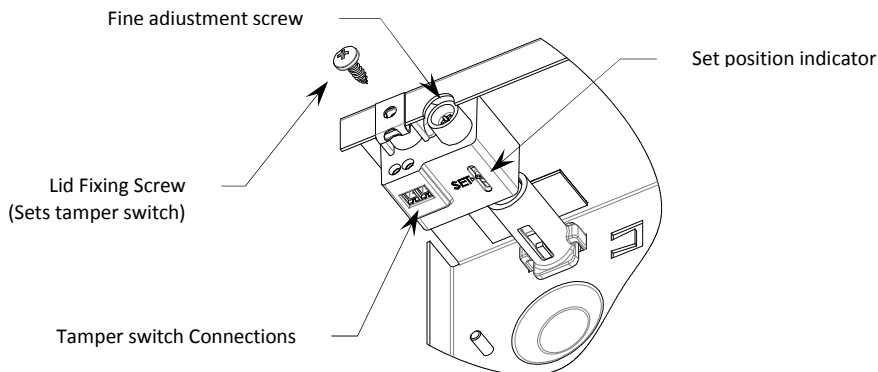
Position of tamper assembly on 'clam shell' style enclosures
